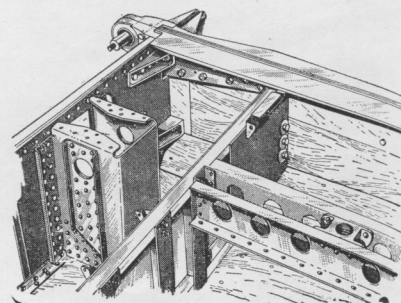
De Havilland Hornet wing with the lower skin removed, showing the method of installing the hinge reinforcing box.
